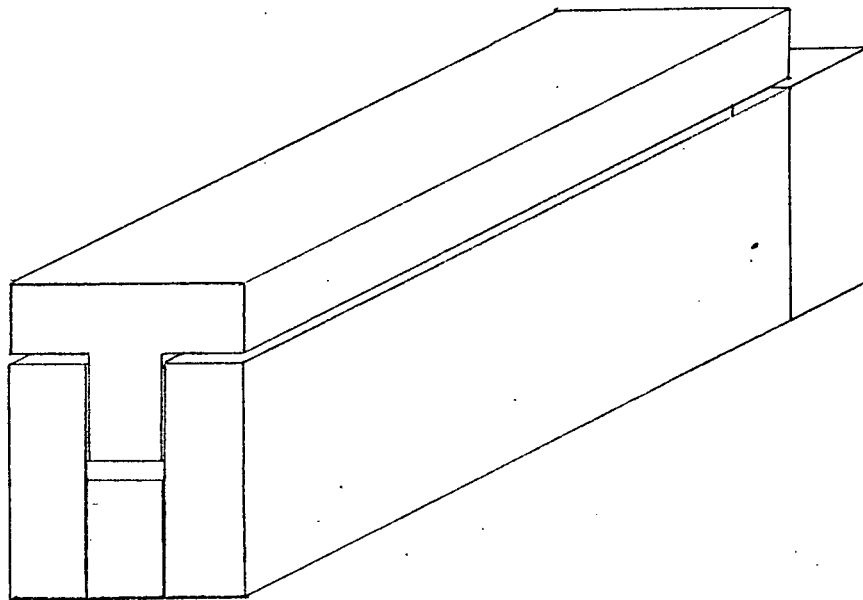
STAINLESS-STEEL MOLD FOR BORON-EPOXY TEST SPECIMEN
